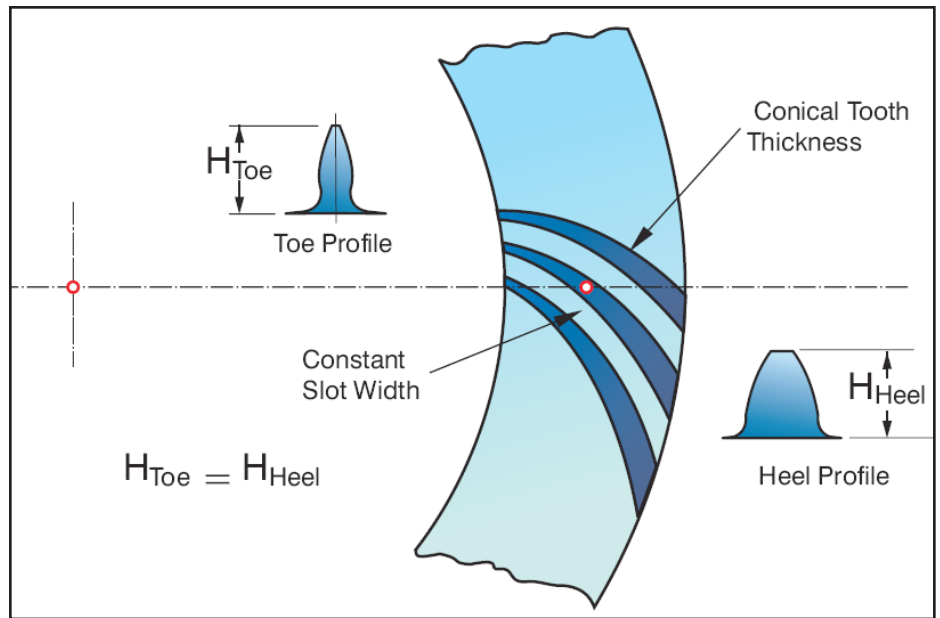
Tapered tooth thickness and constant slot width (face milling).
